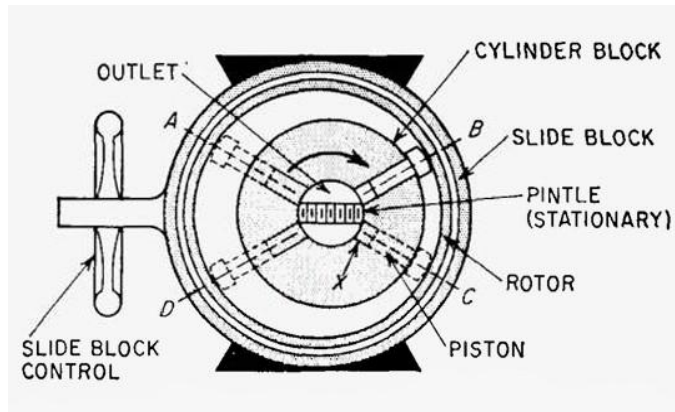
6) Radial-Piston Pump with Rotating Pistons Housing
